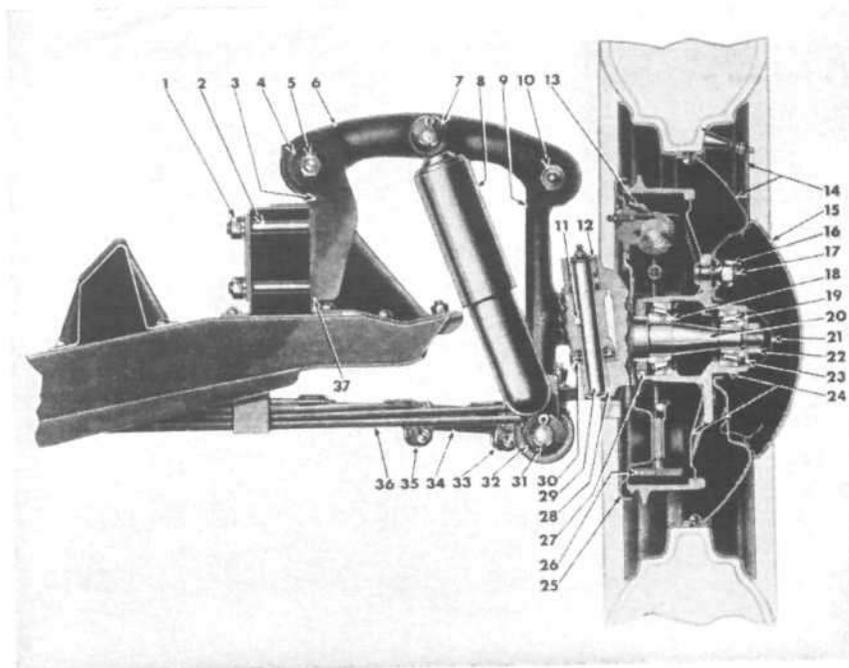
PLANAR FRONT SUSPENSION—TOP VIEW
